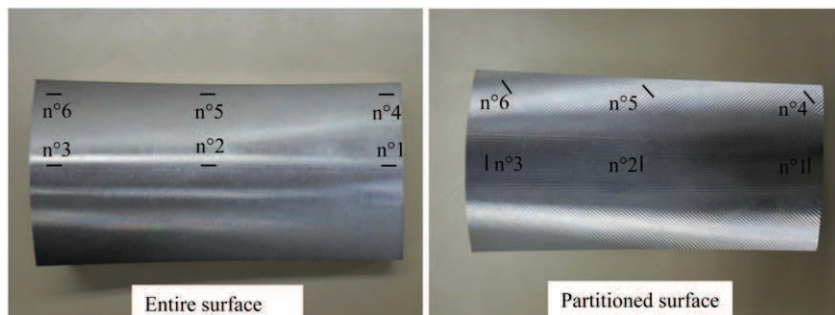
Locations of roughness measurements on the 2 workpieces.
